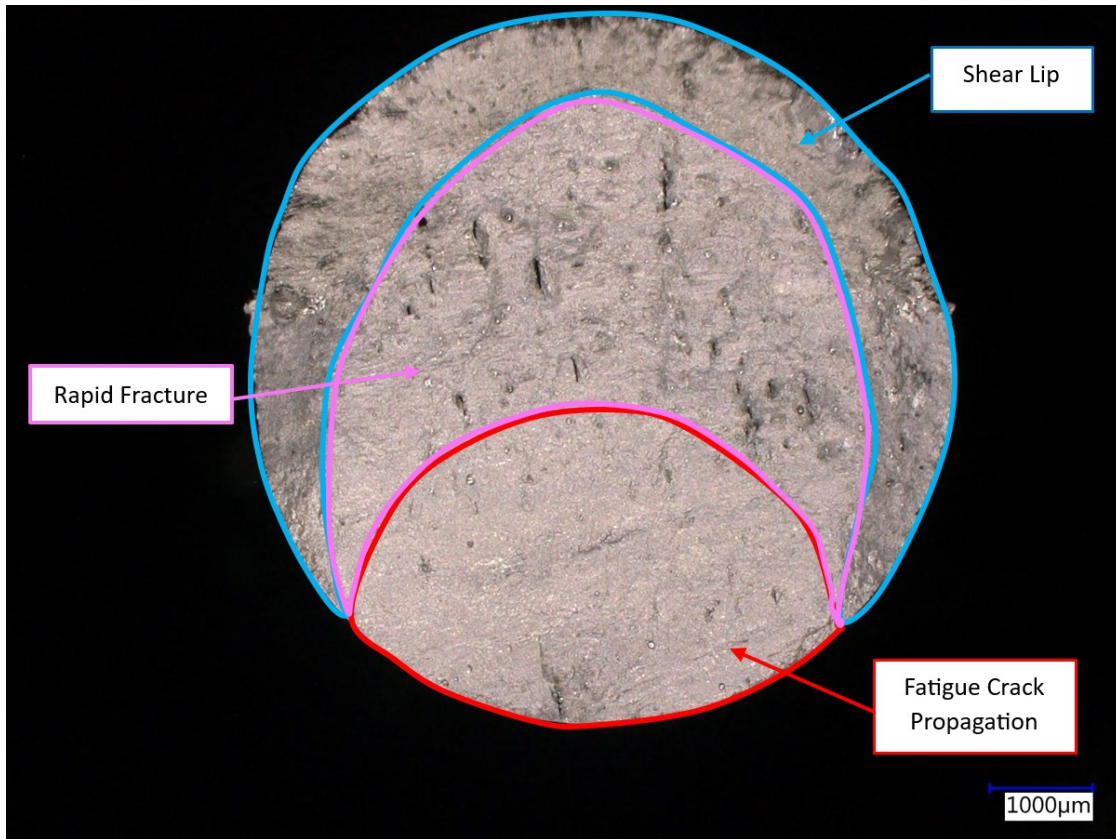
Fatigue crack propagation, rapid fracture, and shear lip areas of fatigue sample 20.
